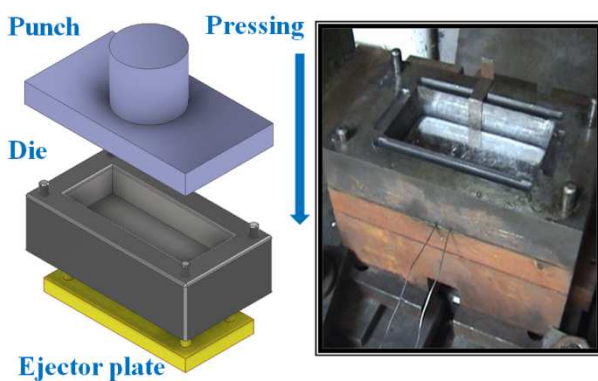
Lower part of metal mold used in research and scheme of pressing system
